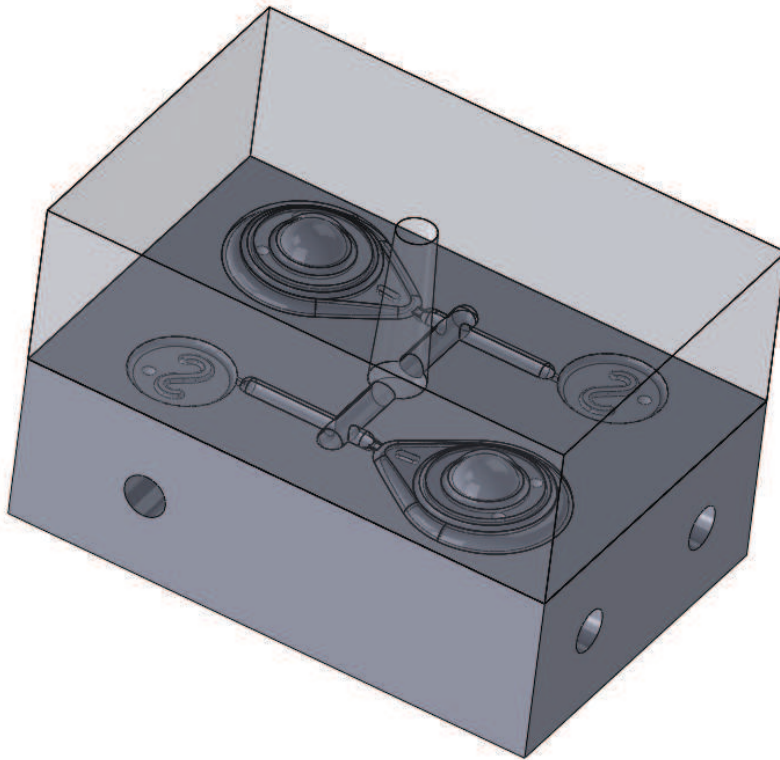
A completed mold insert design for a two-cavity family mold of a fishing lure, minus the cooling lines in one side to more clearly show the design.
